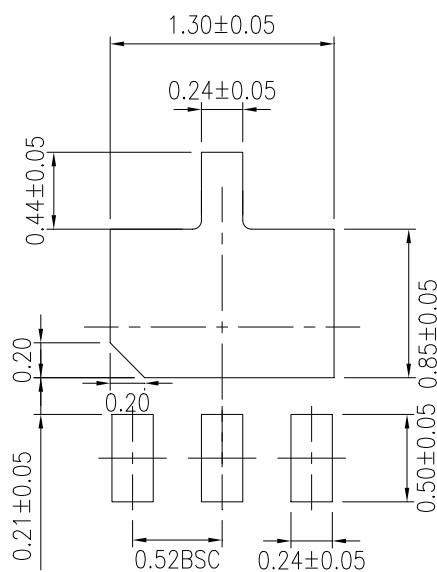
footprint of the sensor chips with DFN1616H055-4L package(unit: mm)..
